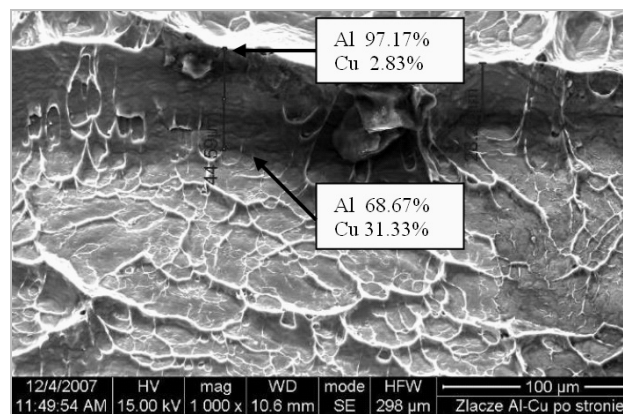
View of the fracture of a sample broken in a rolling test; chemical composition microanalysis has been performed on the Cu side of the fracture by means of a scanning microscope
